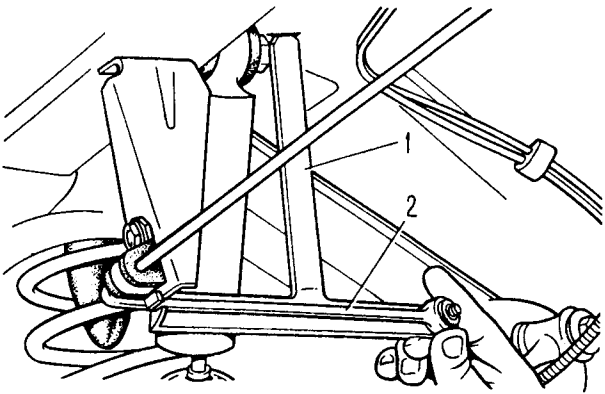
Fixture 67.7820.9519 for Rear Brake Pressure Regulator Adjustment:
